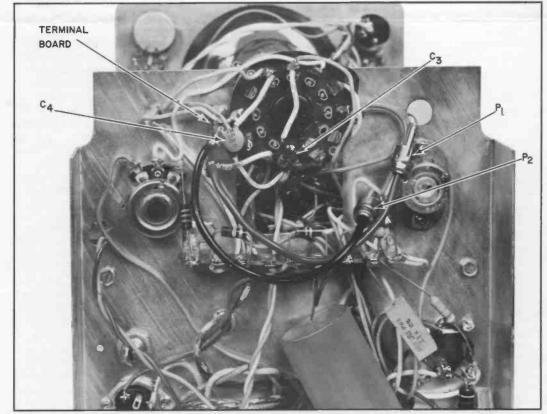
Rear section of chassis at CRT socket showing wiring and connections.
